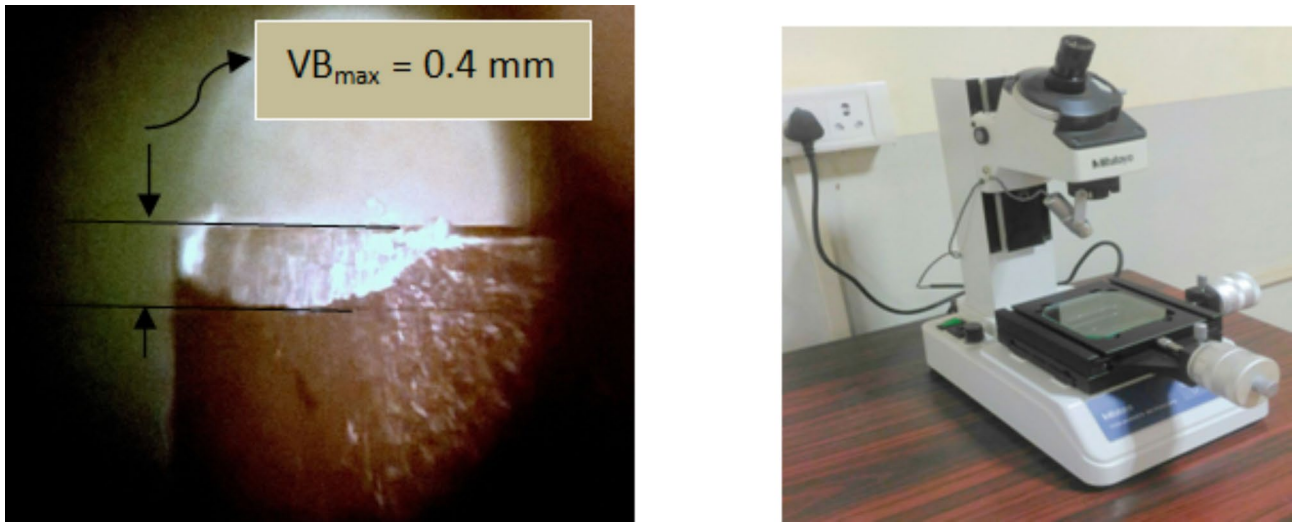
(a) Worn image of coated carbide insert. (b) Tool Maker's Microscope.
